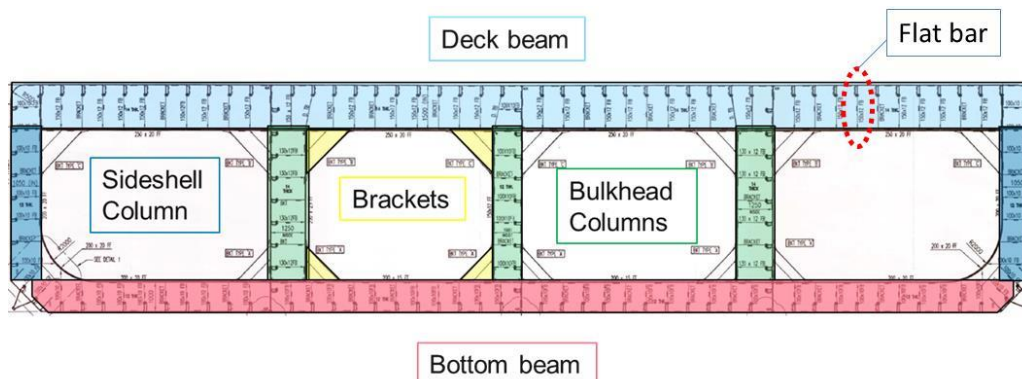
Transverse section of a web frame (not the H-541) shows where the column beams, deck and bottom beams and brackets. [22]
